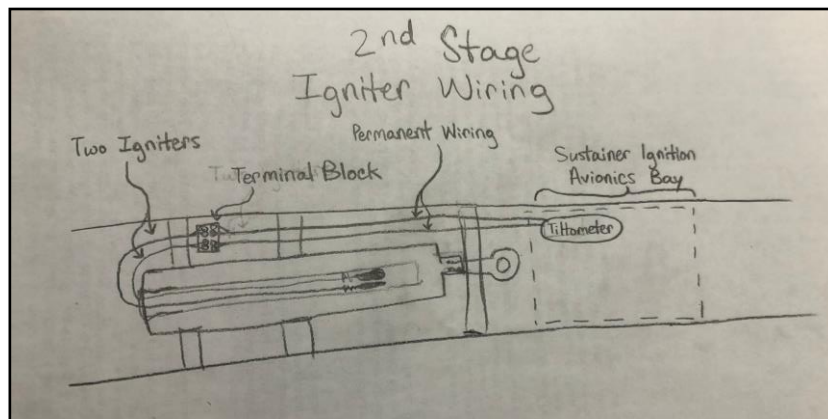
Sustainer ease of assembly igniter wiring concept sketch
